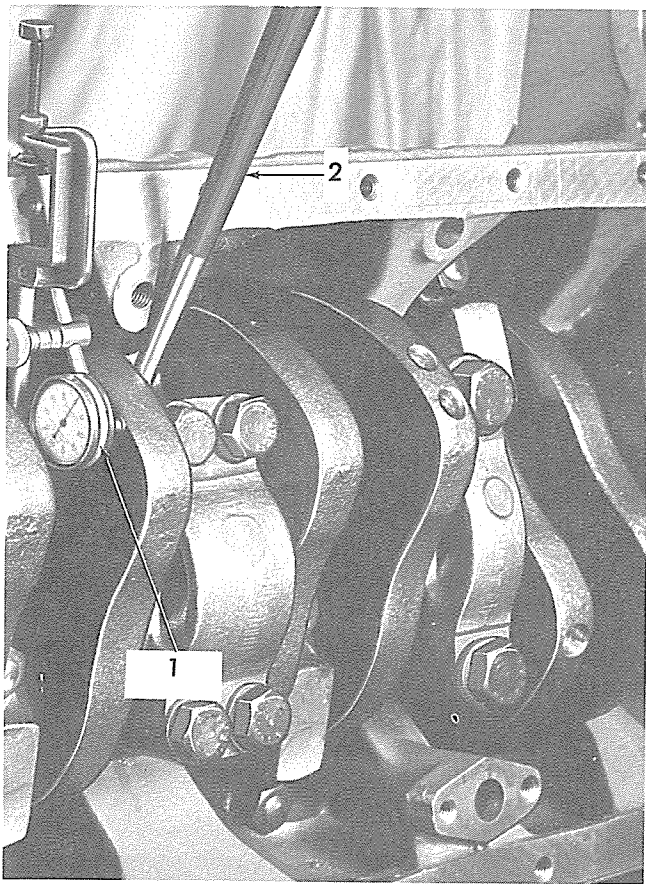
Measuring End Play of Typical Crankshaft (T-71528)
